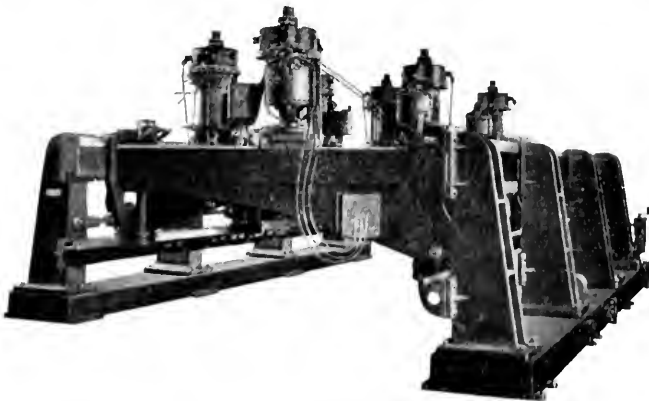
Boiler Plate Drilling Machine. Note motors direct geared to drills
